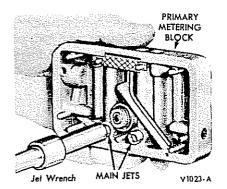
REMOVING OR INSTALLING MAIN JET
